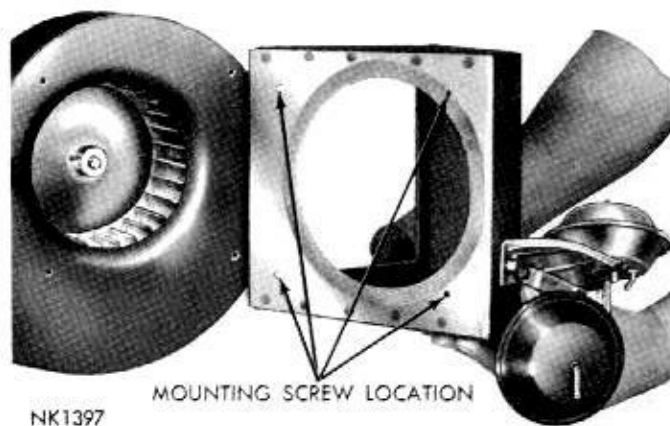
Fresh Air-Recirculating Door Housing Removal and Installation
